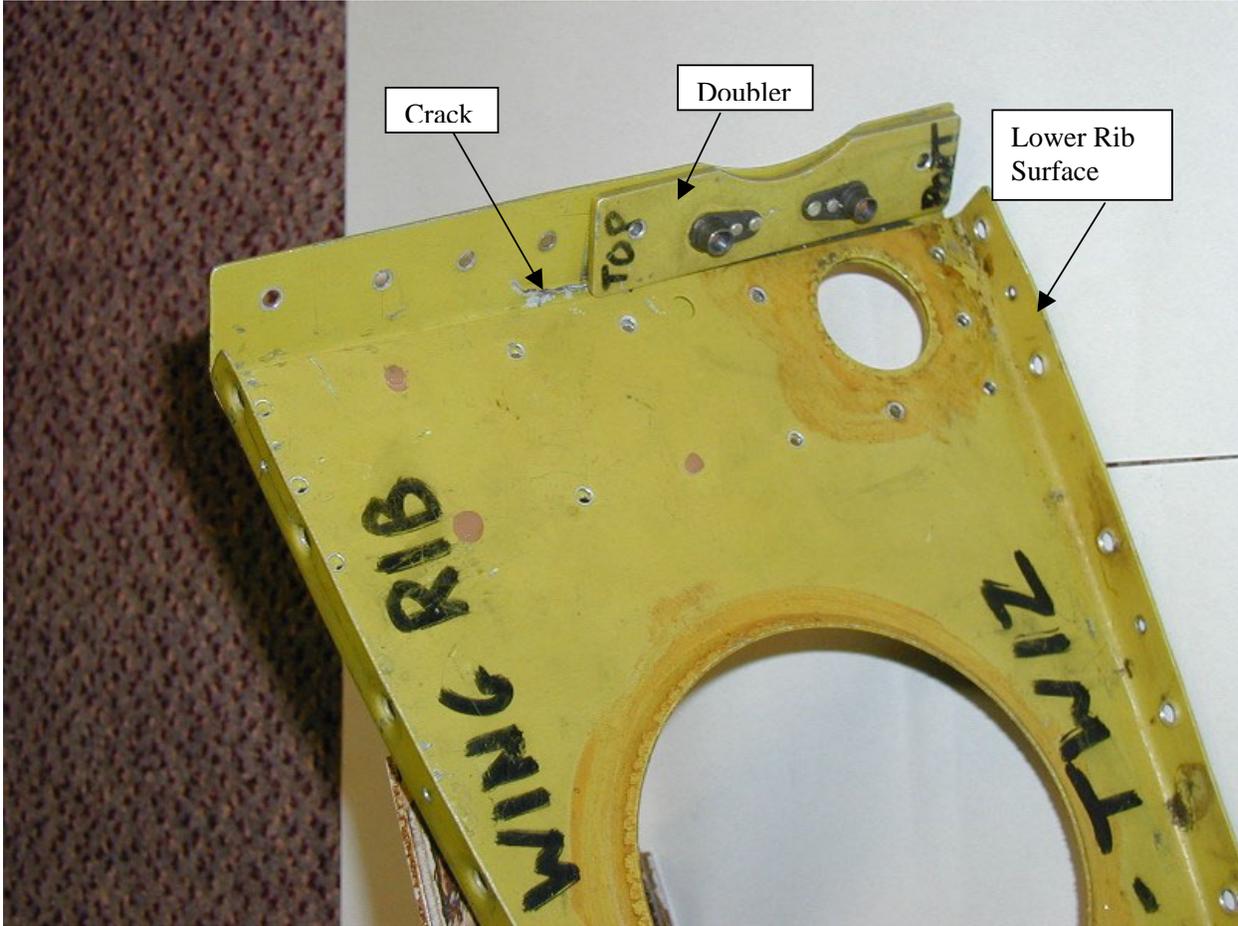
Front View Showing Crack Extending Above The Aft Flange Doubler
